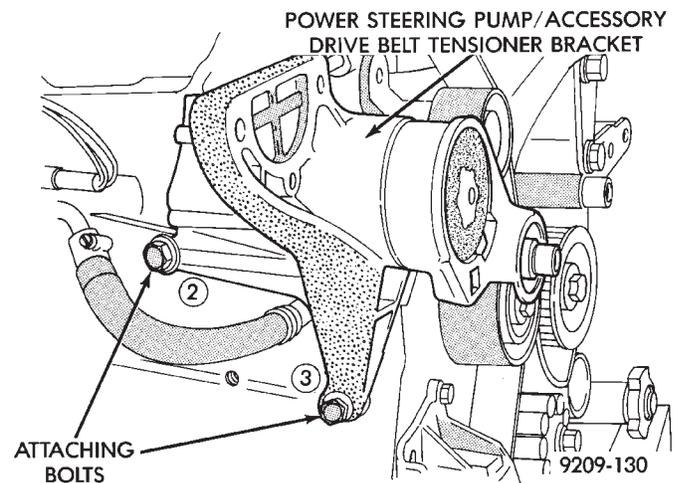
Power Steering Pump/Accessory Drive Belt Tensioner Bracket Attaching Bolts
